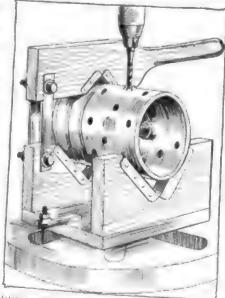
CLAMP TO HOLD PISTONS UNDER DRILL WHILE BORING OIL DRAINS
